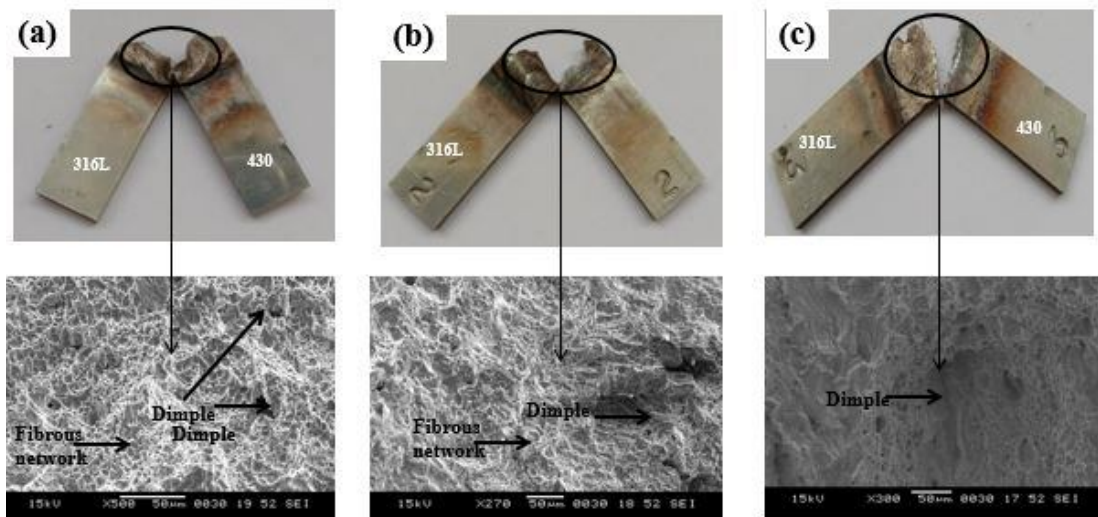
Fractography of impact test for a) ER316L, b) ER 309L and c) autogenous weld
